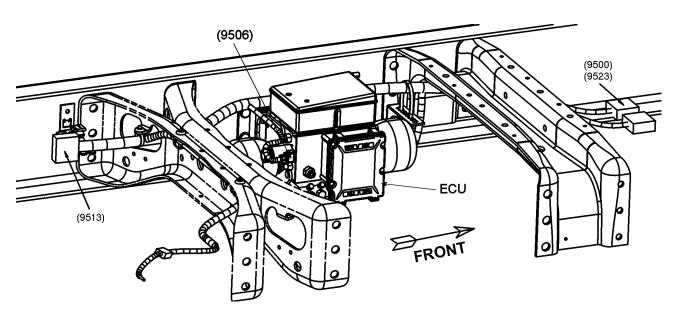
Hydraulic ABS ECU Location (Mounted on Hydraulic Compact Unit)
